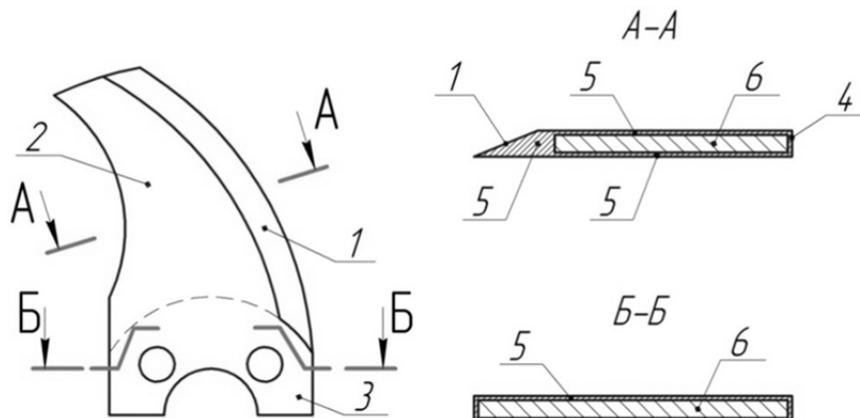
Hardening pattern of the knife according to the developed method: 1 – knife blade; 2 – working part; 3 – mounting part; 4 – back edge; 5 – face-hardened layer with an increased hardness; 6 – normalized or improved layer with a reduced hardness.
